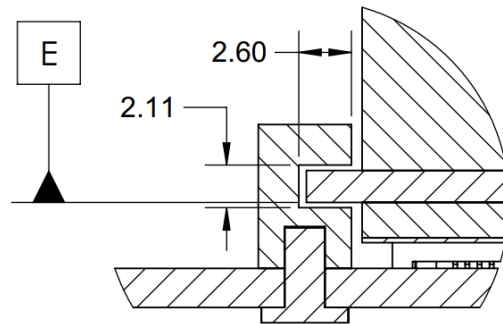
SFF Baseboard Chassis CTF Dimensions (Rail Guide Detail) – Detail C
